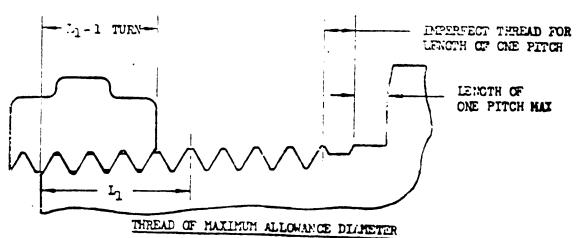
Application of thin ring taper thread gaye (0.15p).
